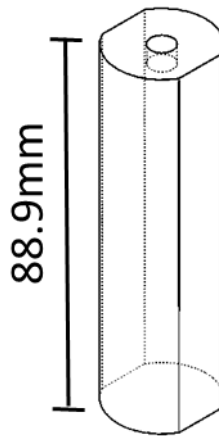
3D Solidworks drawing of 88.9 mm bar used in Jominy test
